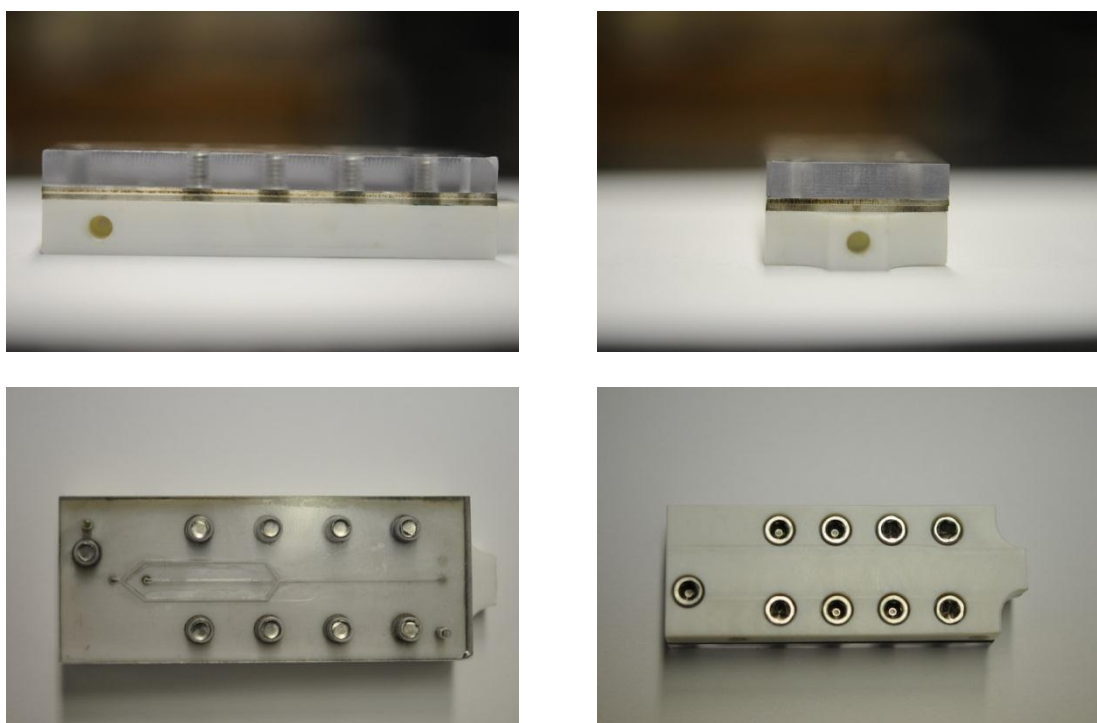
PC+PET fixture used for microfluidic platform assembly.
